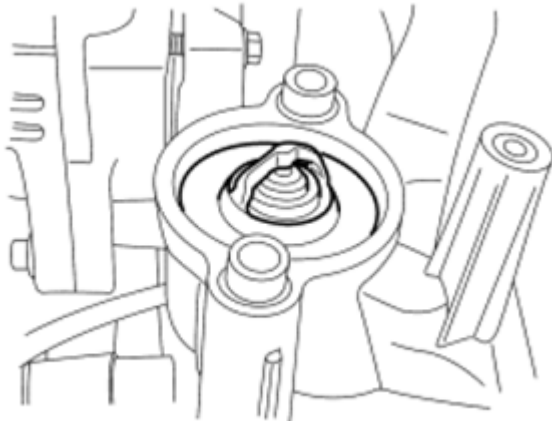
Locating Coolant Outlet Adapter Mounting Bolts
